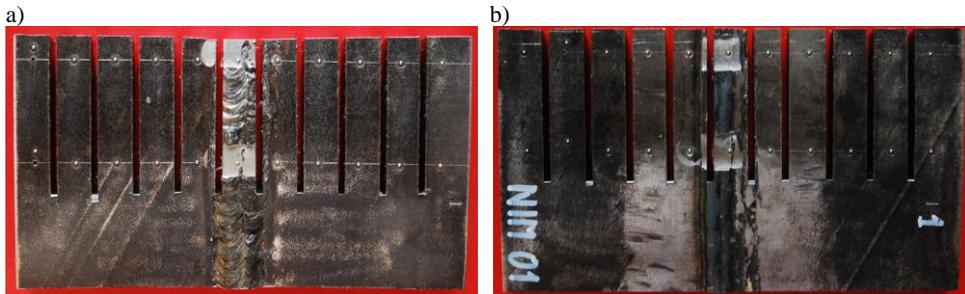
Welded plate with basses after cutting, filler material a) Pipeliner 6P+ FOX EV85, b) LMN MoNiVa
